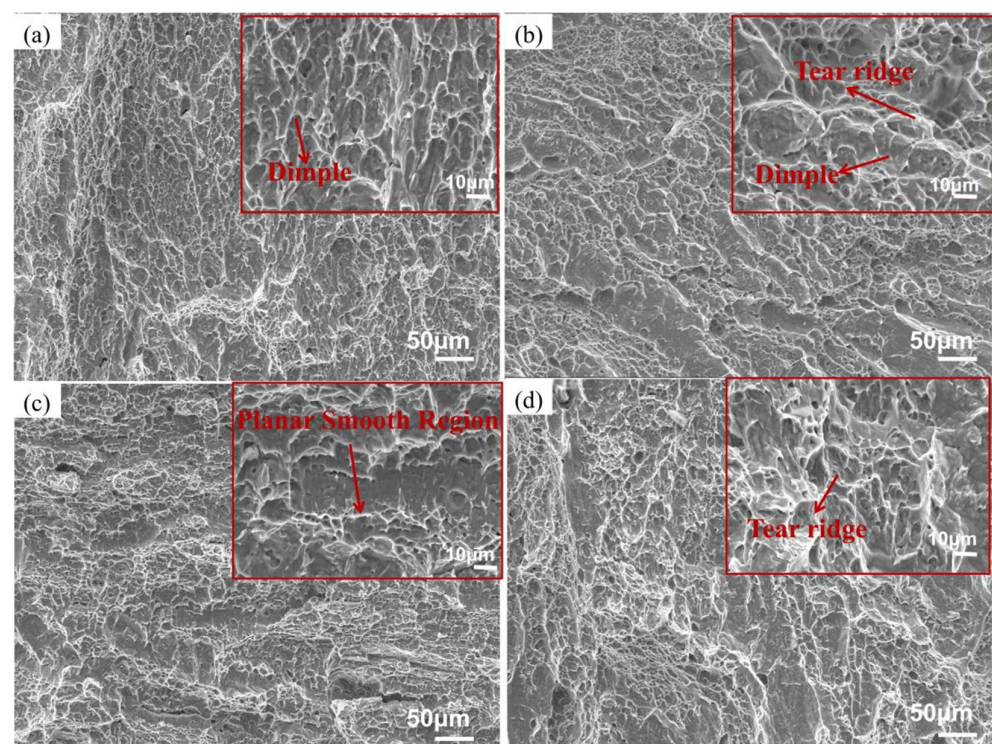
High-magnification impact fracture morphologies: (a) T-S, (b) L-T, (c) T-L and (d) L-S.
